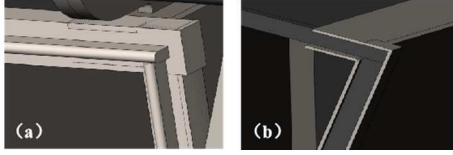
Connecting form of middle seal strip and end seal strip (a) steel strip connection (b) rubber connection
